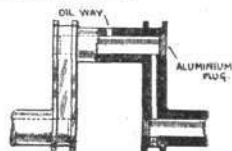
Sectional sketch illustrating the oil-ways in the crank-shaft of the Green engine.
